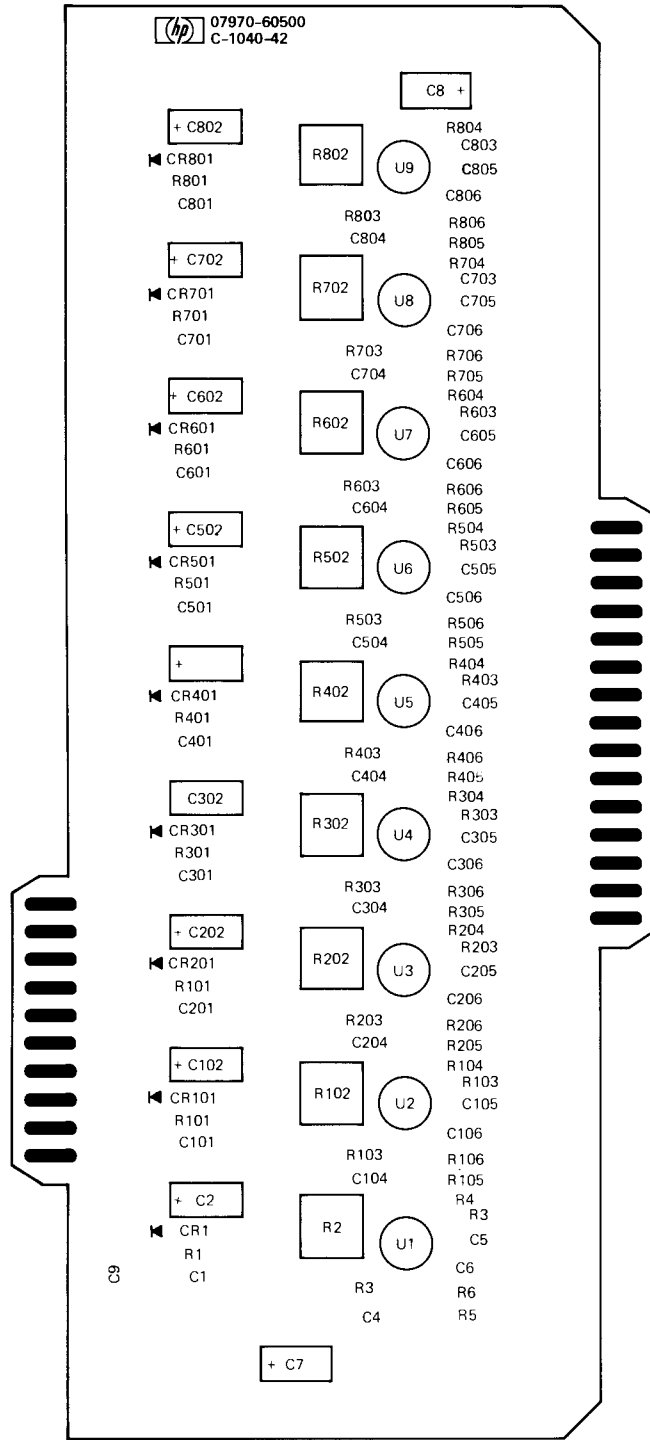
Read Preamp PC Assembly A15, Parts Location Diagram (Sheet 2 of 2)
